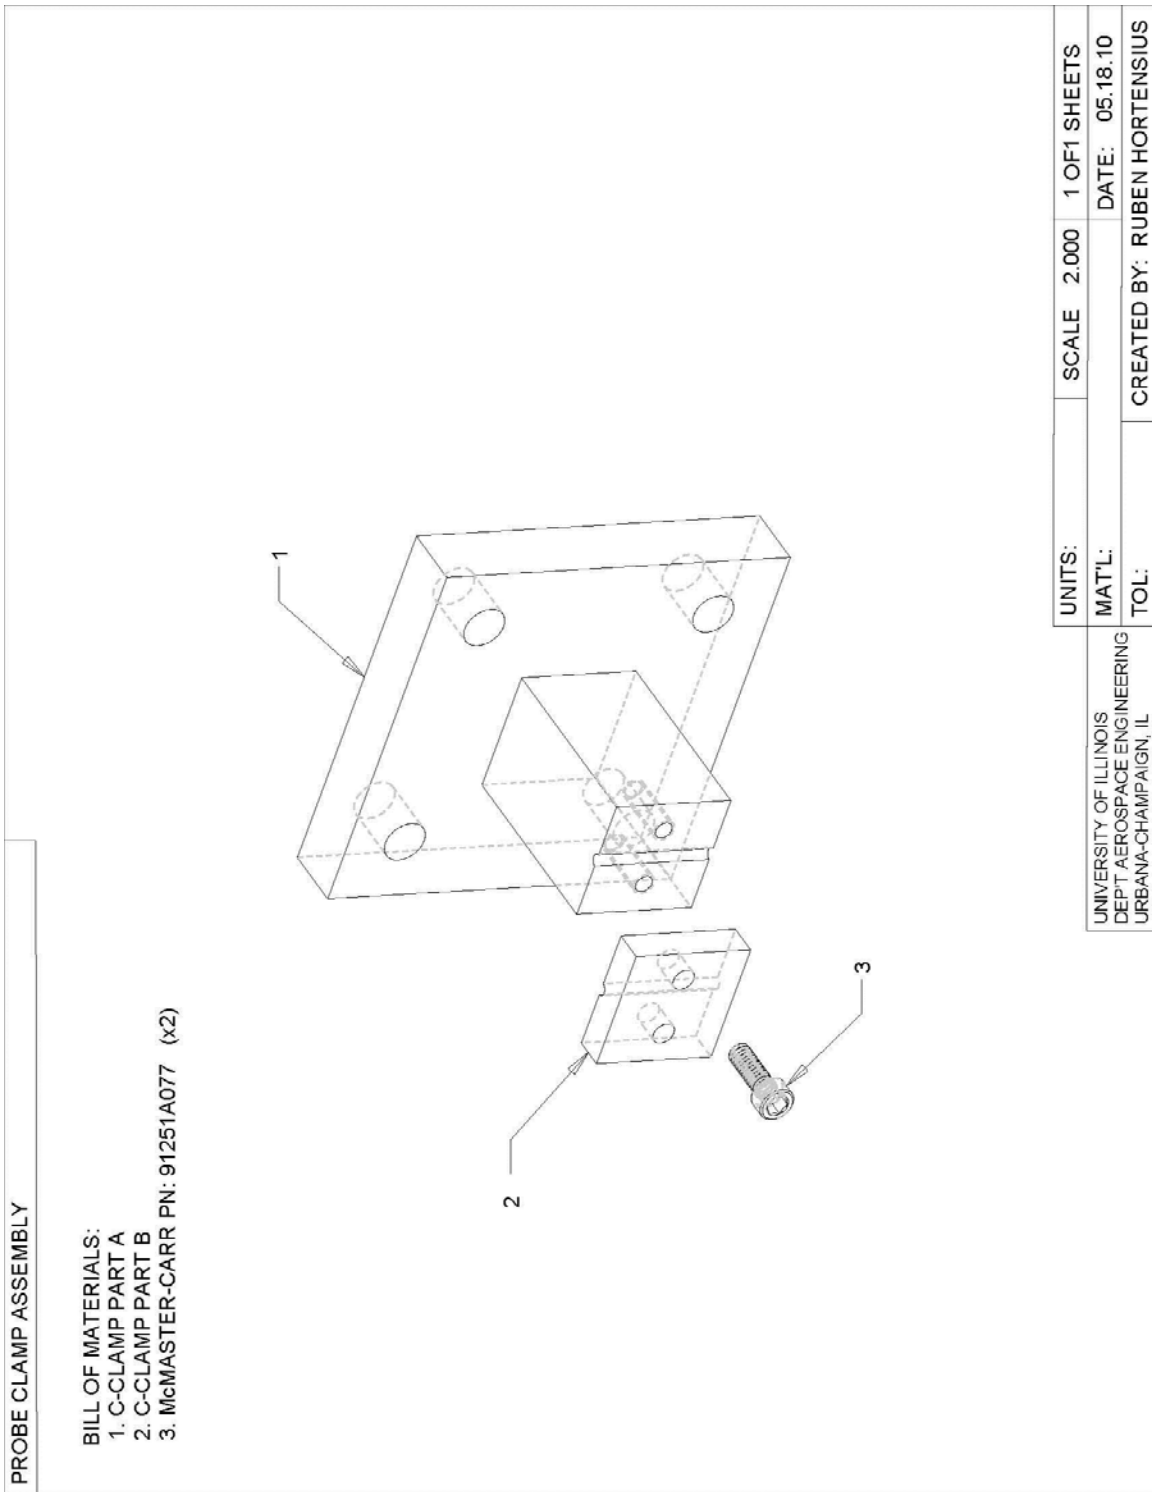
Probe Traverse Clamp Subassembly Drawing.
